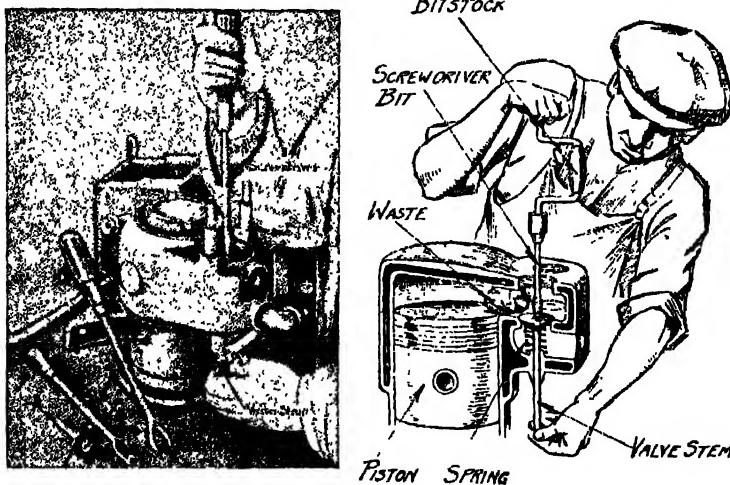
Showing Practical Methods of Valve Grinding. At Left, with Ordinary Screw Driver; at Right, with Screw Driver Bit and Bitstock.
